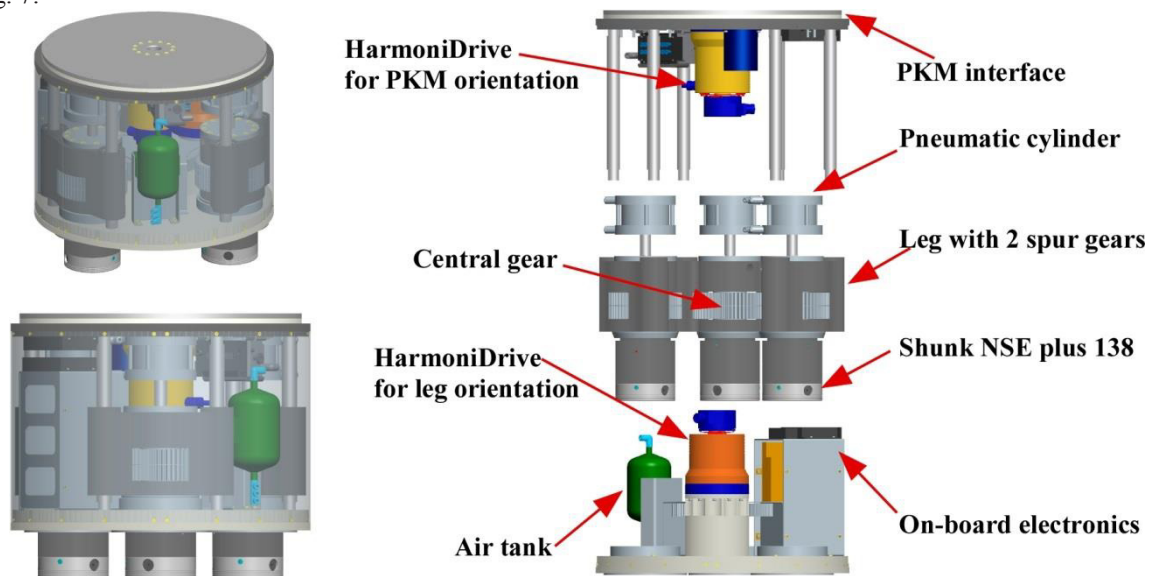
Exploded view of the SwarmItFIX mobile base final design.
